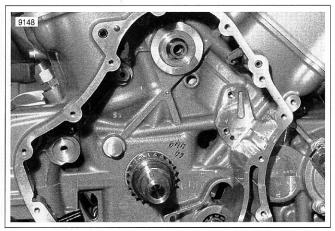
Triple Sprocket and Primary Cam Chain Removed
